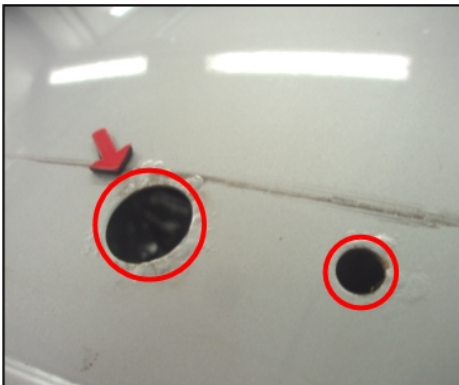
(corrosion around the roof openings – B6 Passat shown)
